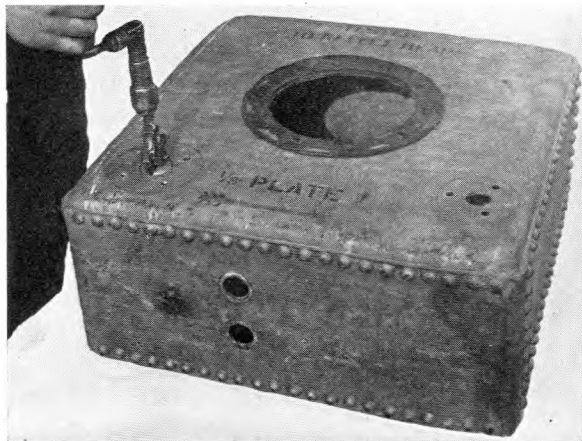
USING A HOLE CUTTER FOR CUTTING THE HOLES IN THE TANK.
